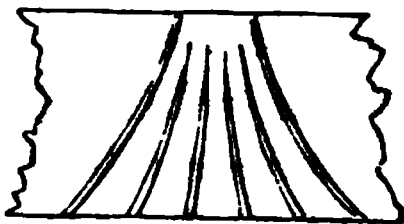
Drawing Frame; curved guide plate of the drawings.
